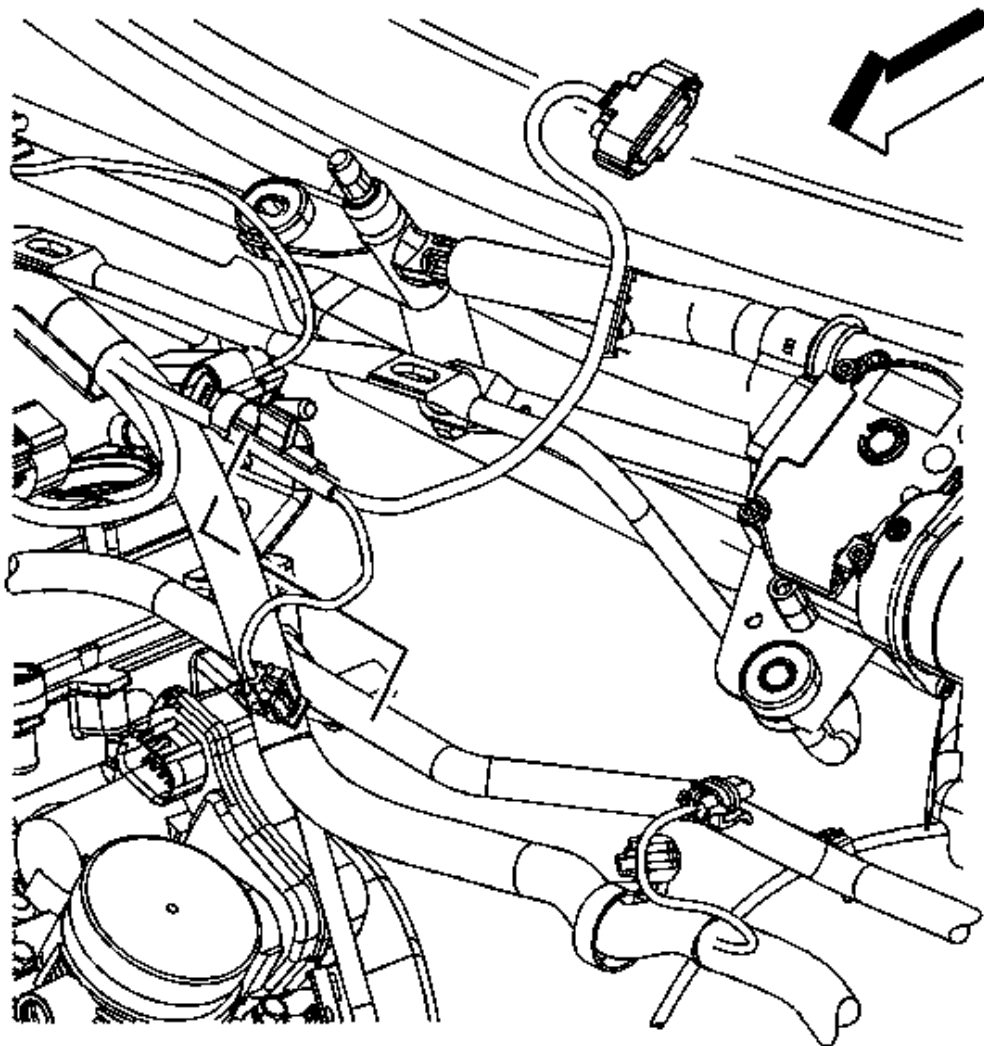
View Of Engine Harness Clip To Surge Tank Air Bleed Hose
